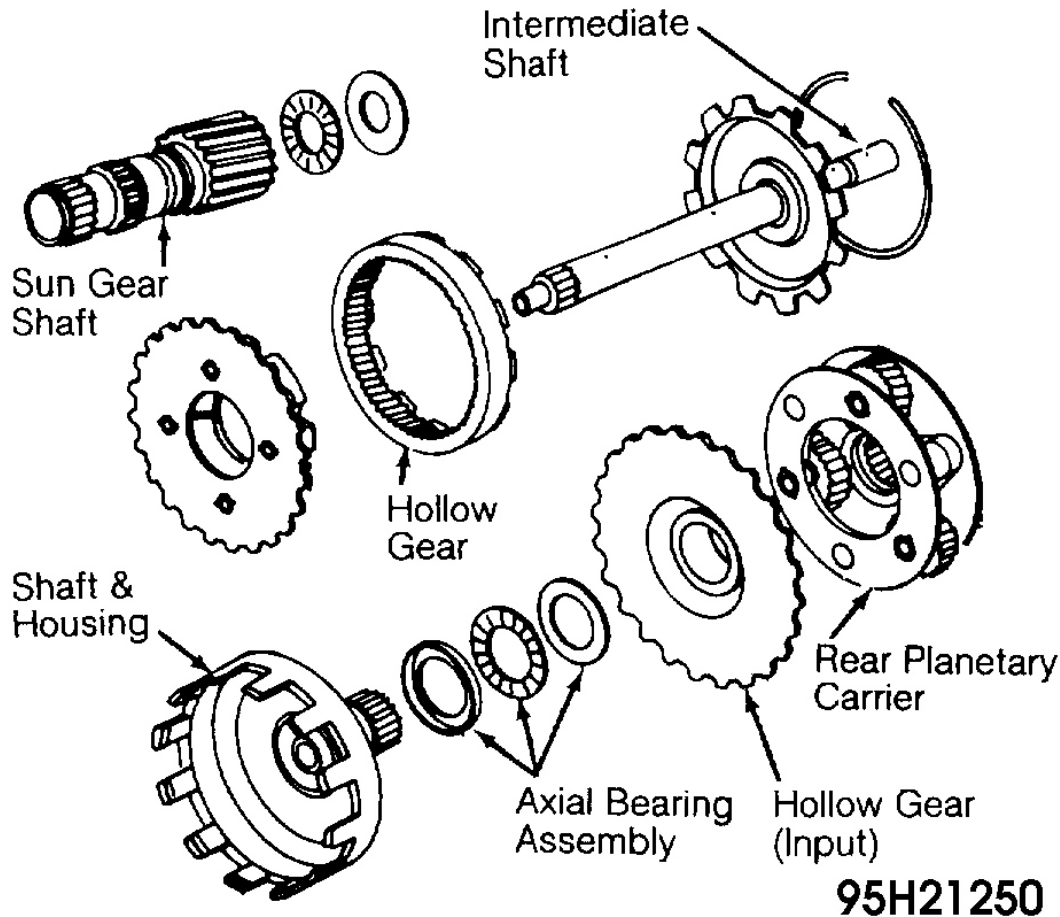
Exploded View Of Rear Planetary Gear Assembly
